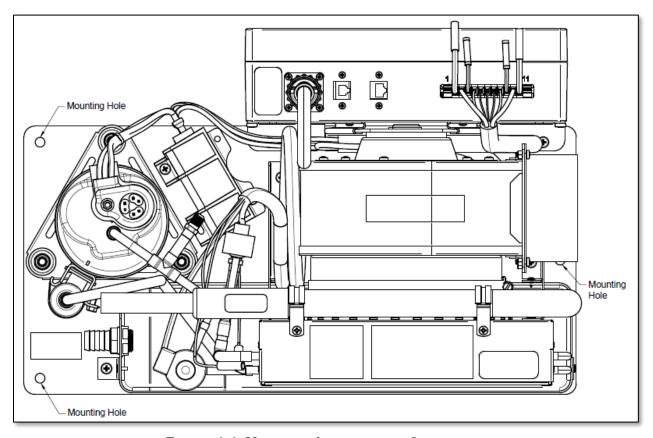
MOUNTING INSTALLATION OVERVIEW
